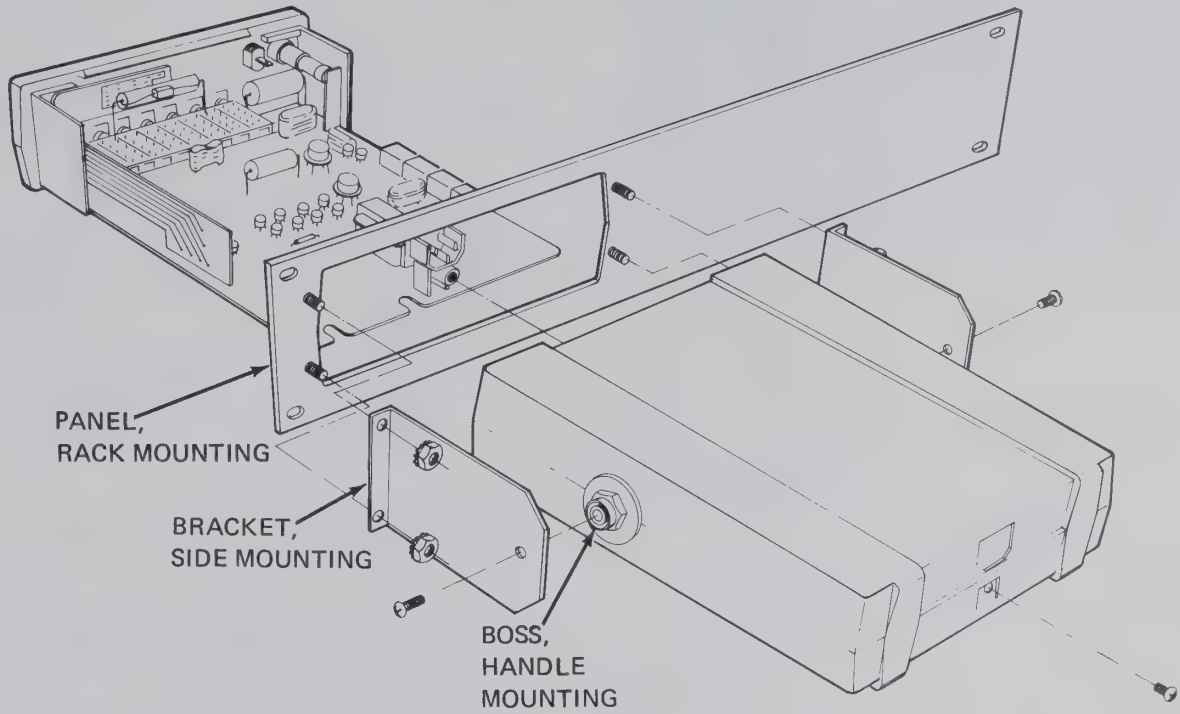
RACK MOUNTING KITS, OFFSET AND CENTER MOUNTING
